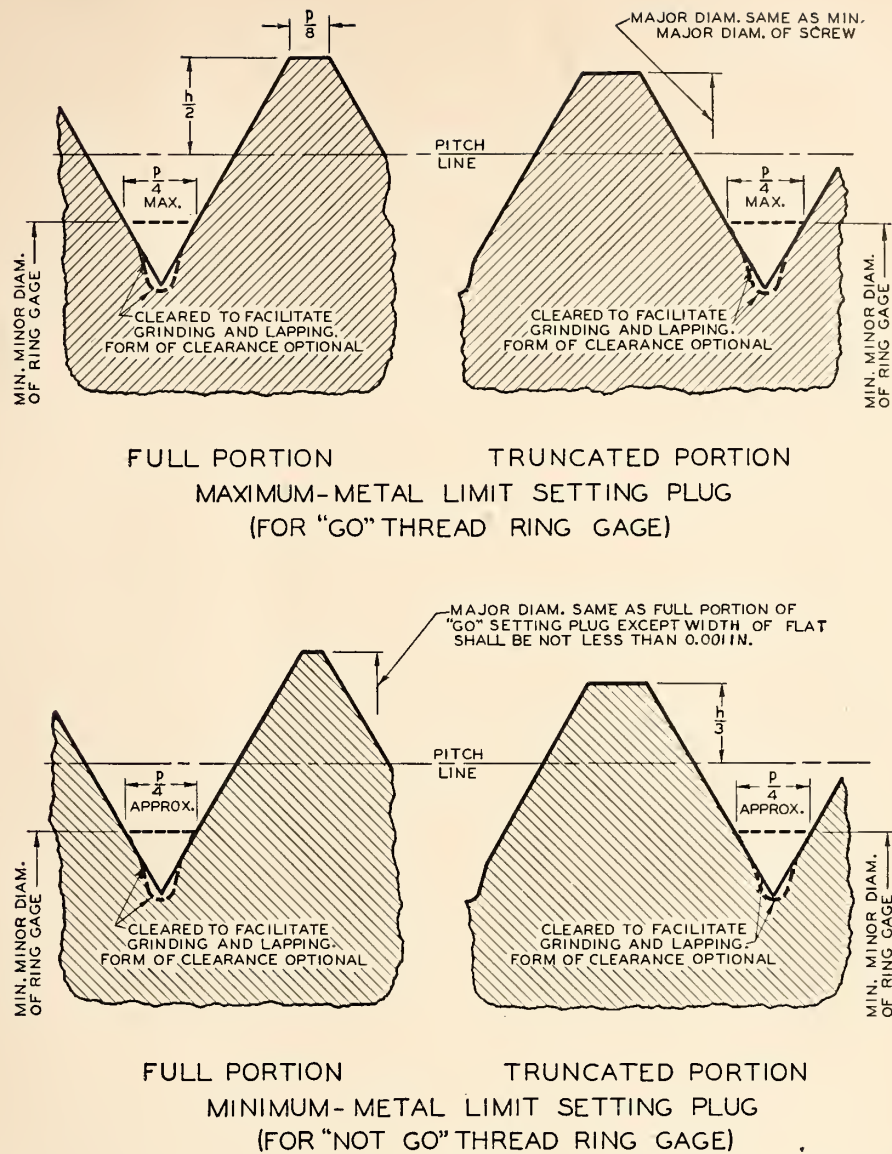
Thread form of maximum-metal and minimum-metal limit thread setting plug gages.
